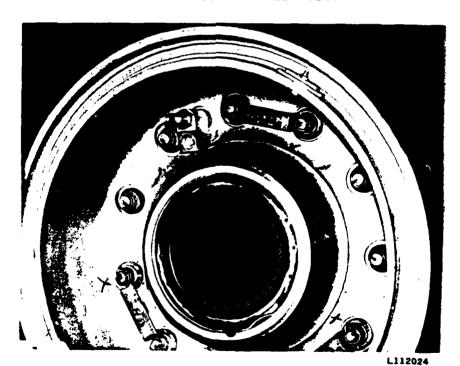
STEP 4 = INSTALL BANJO BOLT ASSEMBLY
